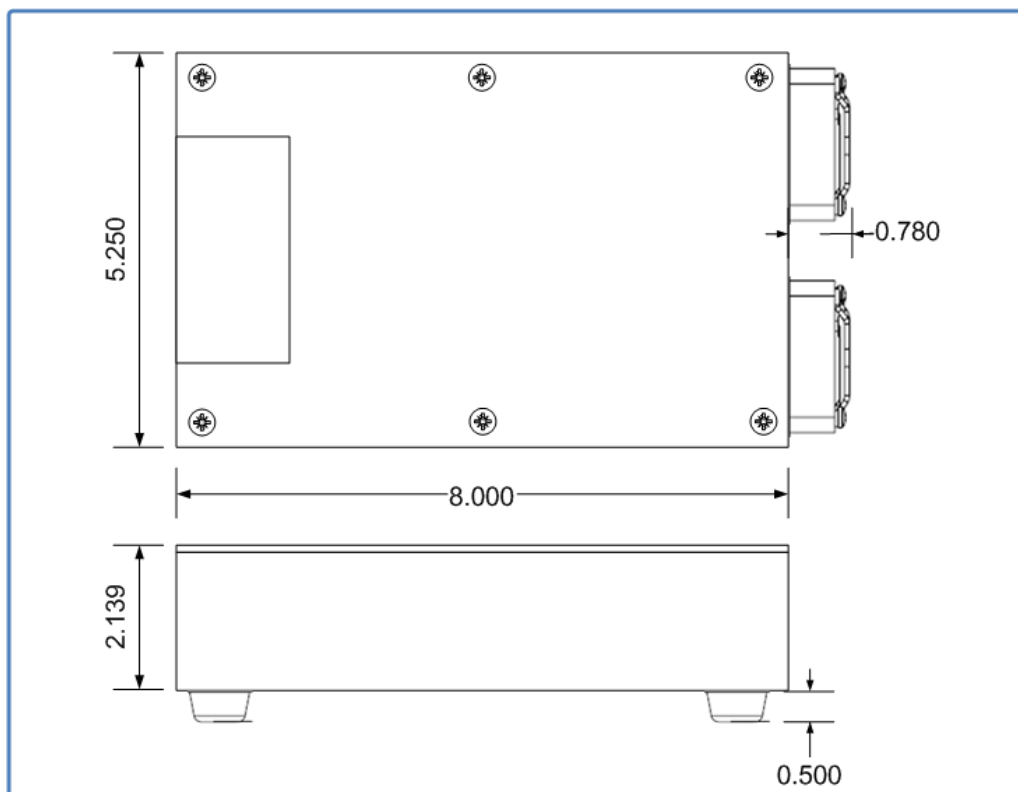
LS-27-M Desktop chassis – Envelope Dimensions
